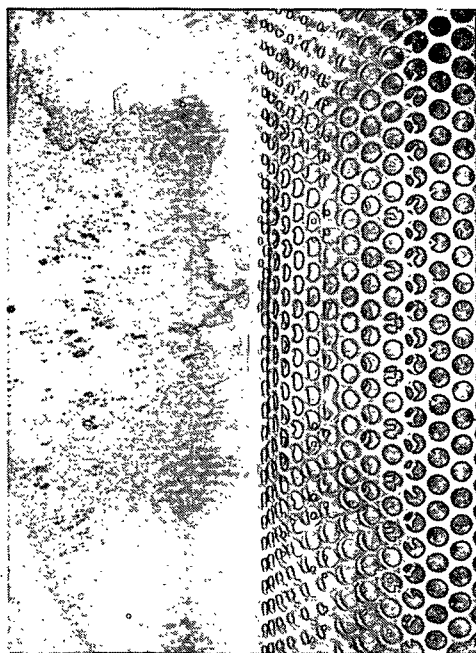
Pitting and crevice corrosion of a paper machine headbox
